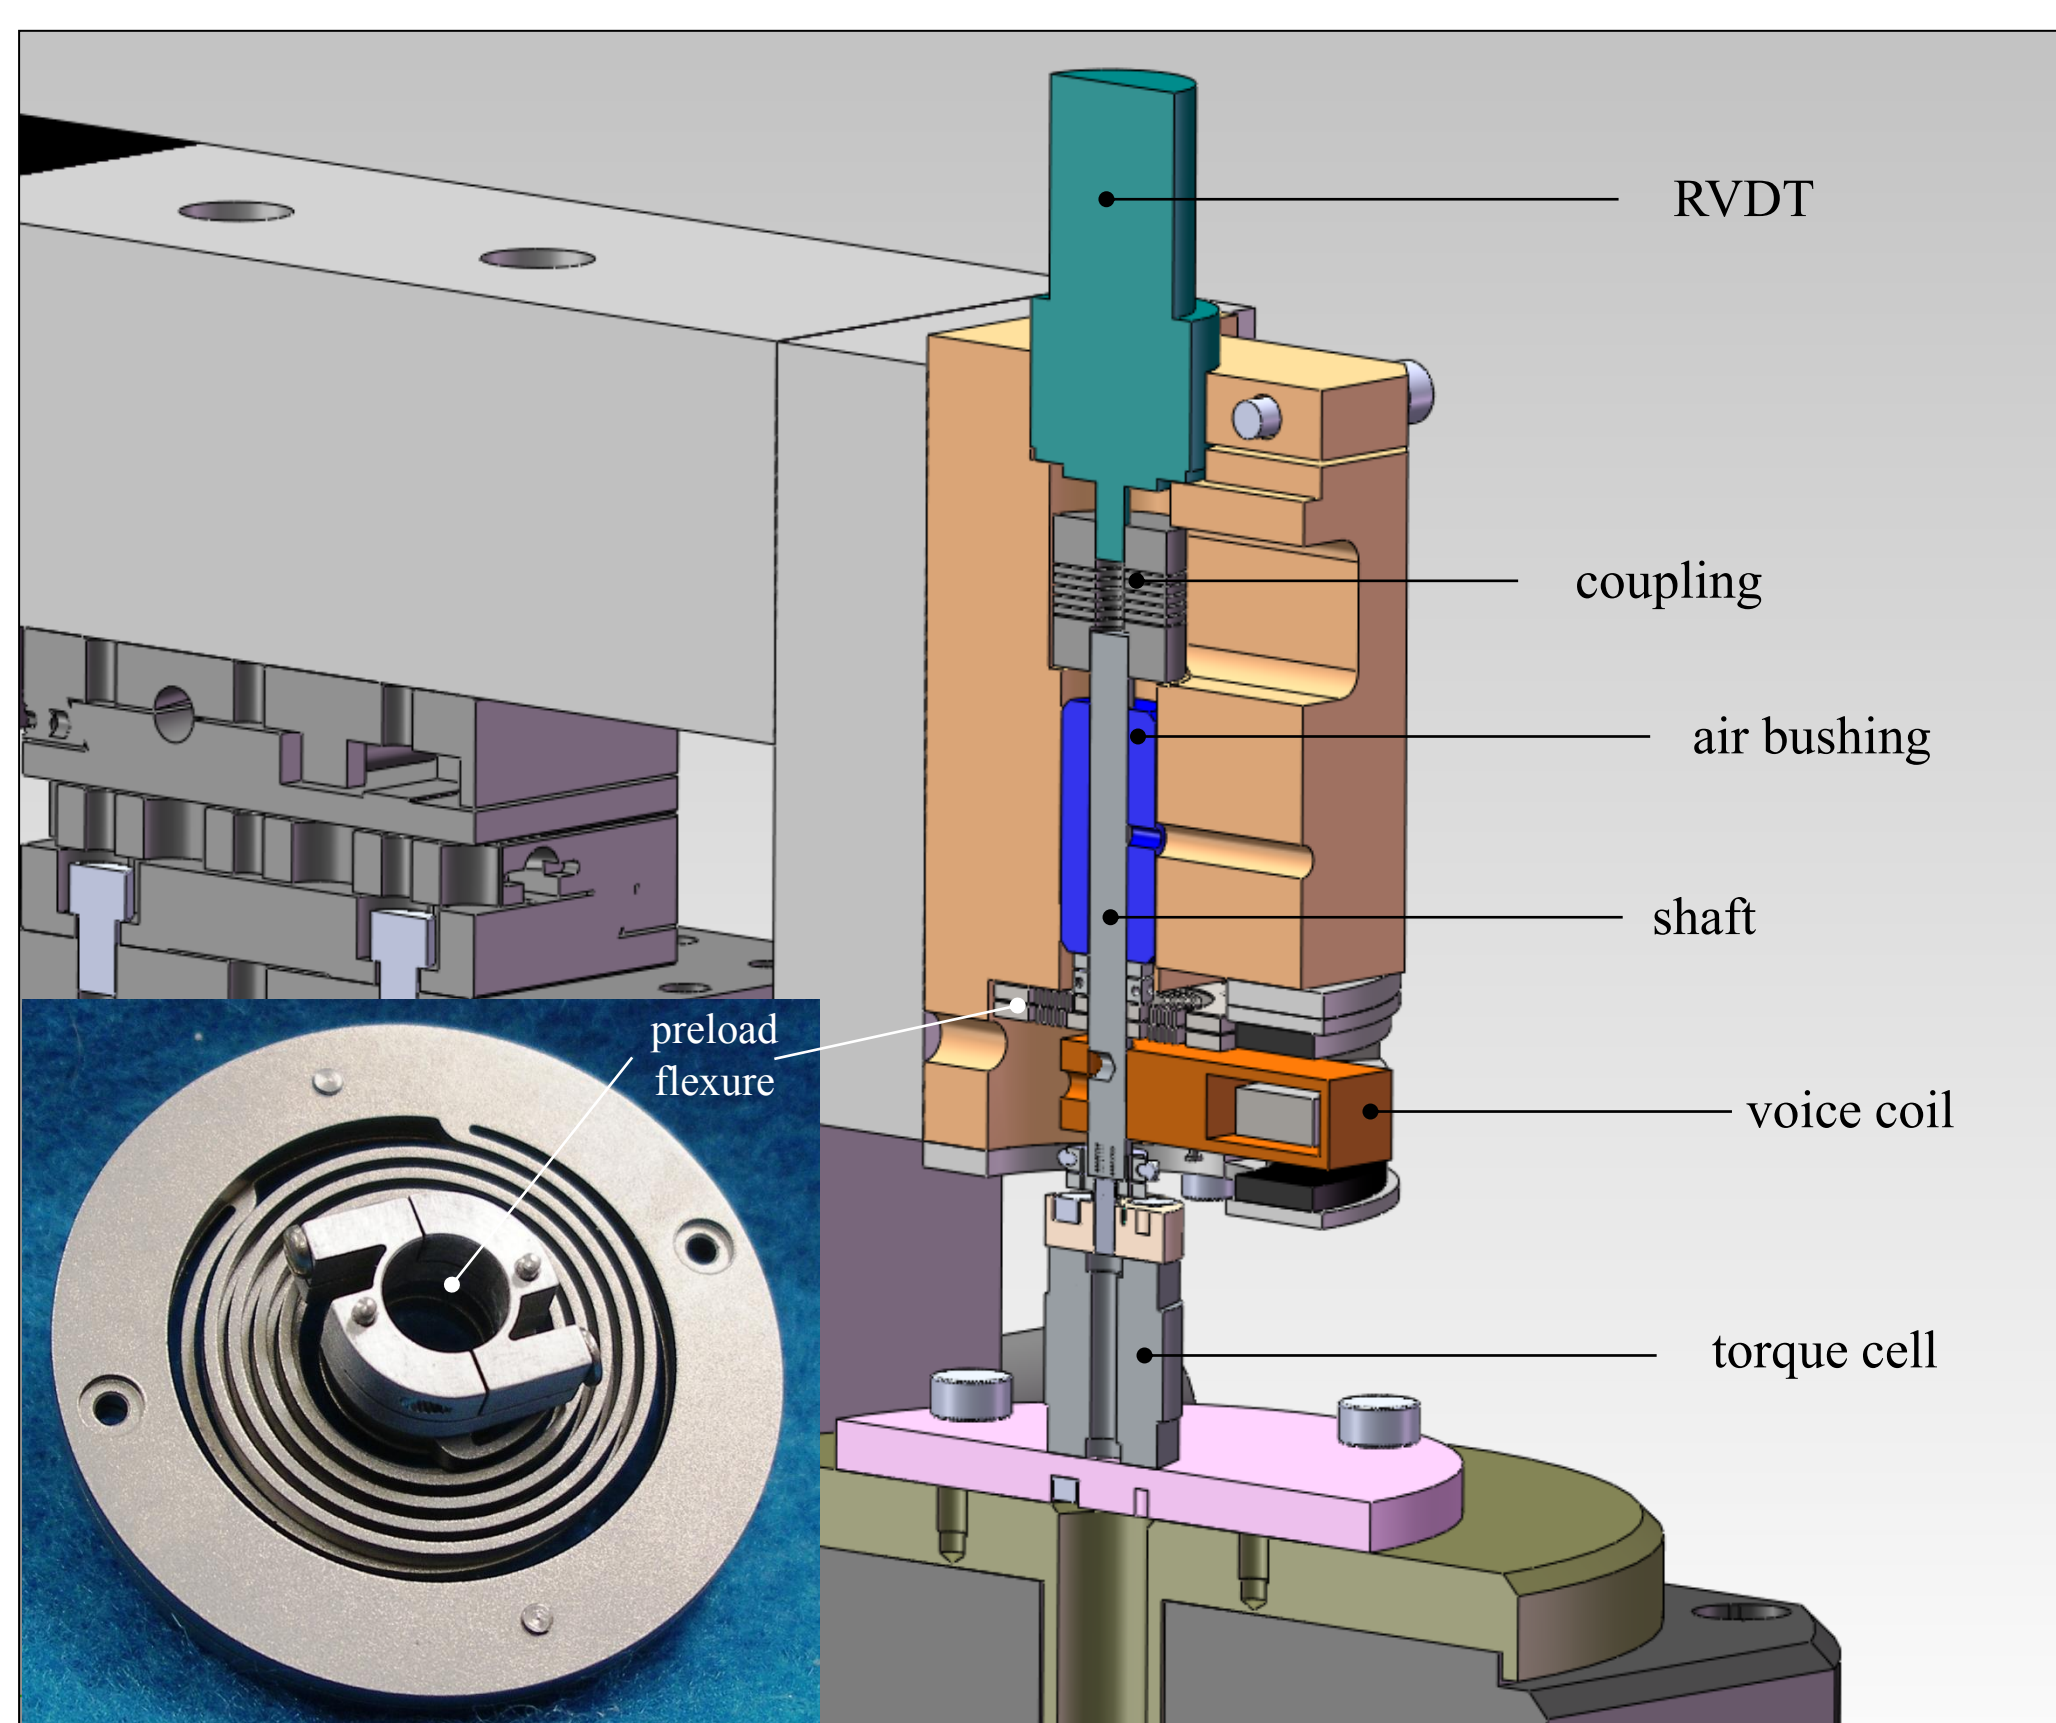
A cross-sectional view identifying critical elements of the actuation mechanism.
